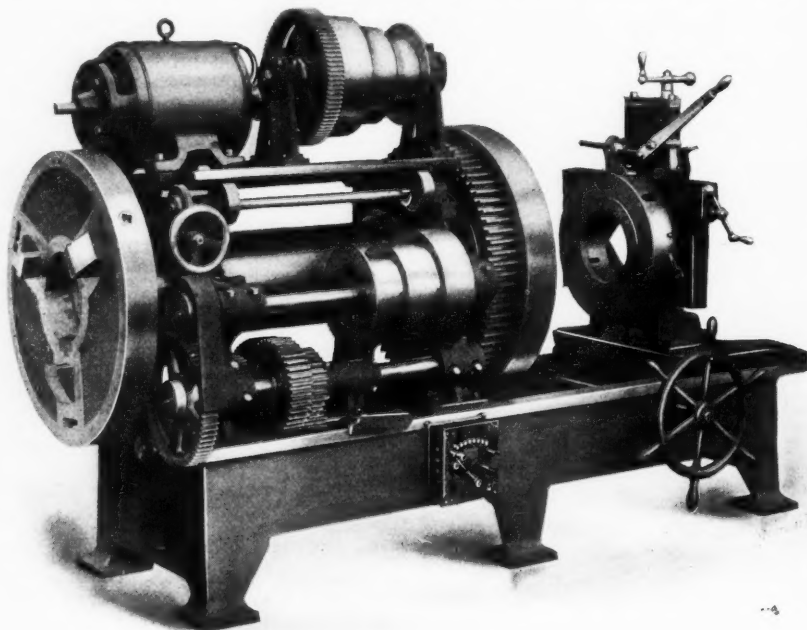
Bignall & Keeler Electrically Driven Pipe Threading Machine.
